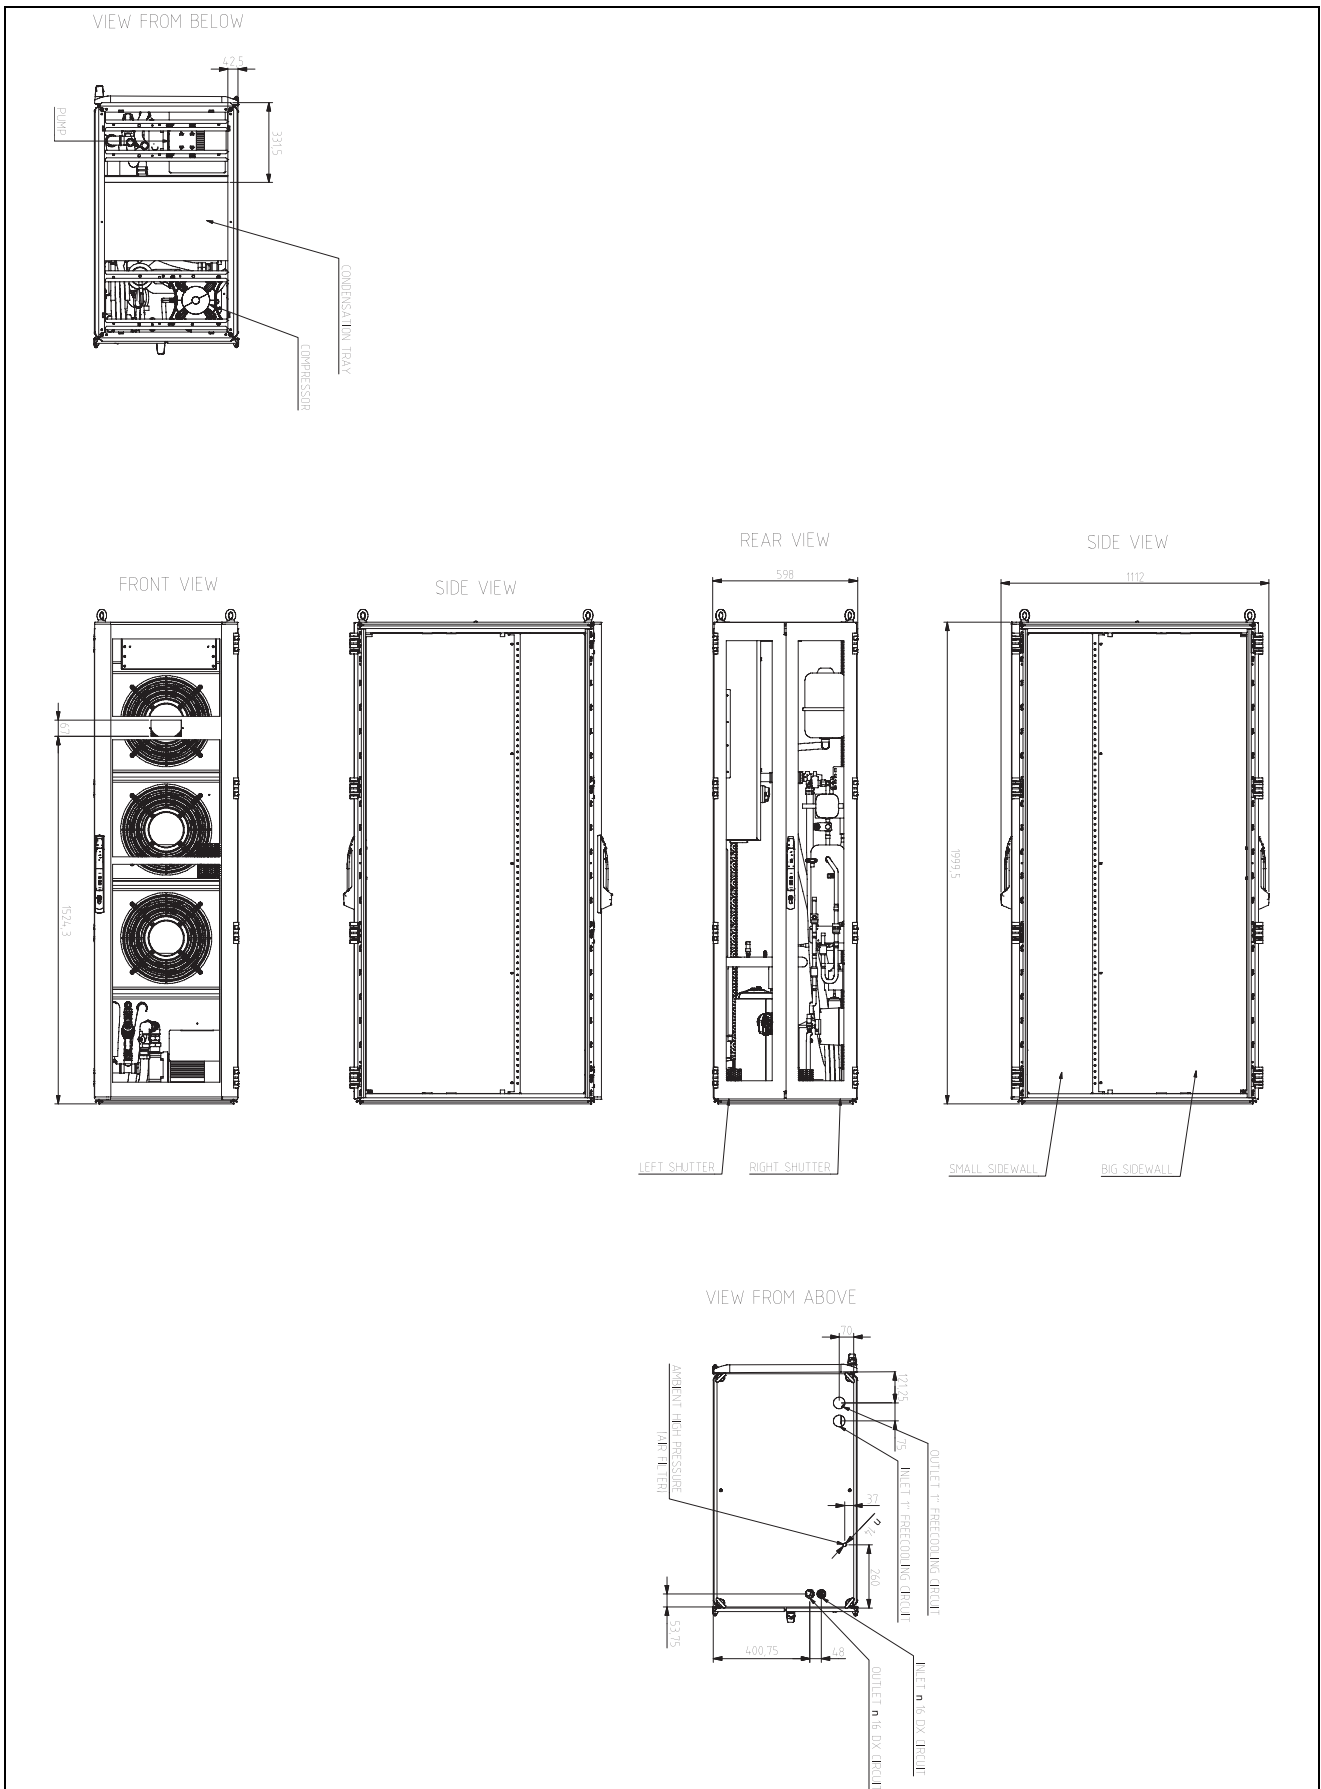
Overview drawing 1 of the LCP DX (depth 1000 mm)
